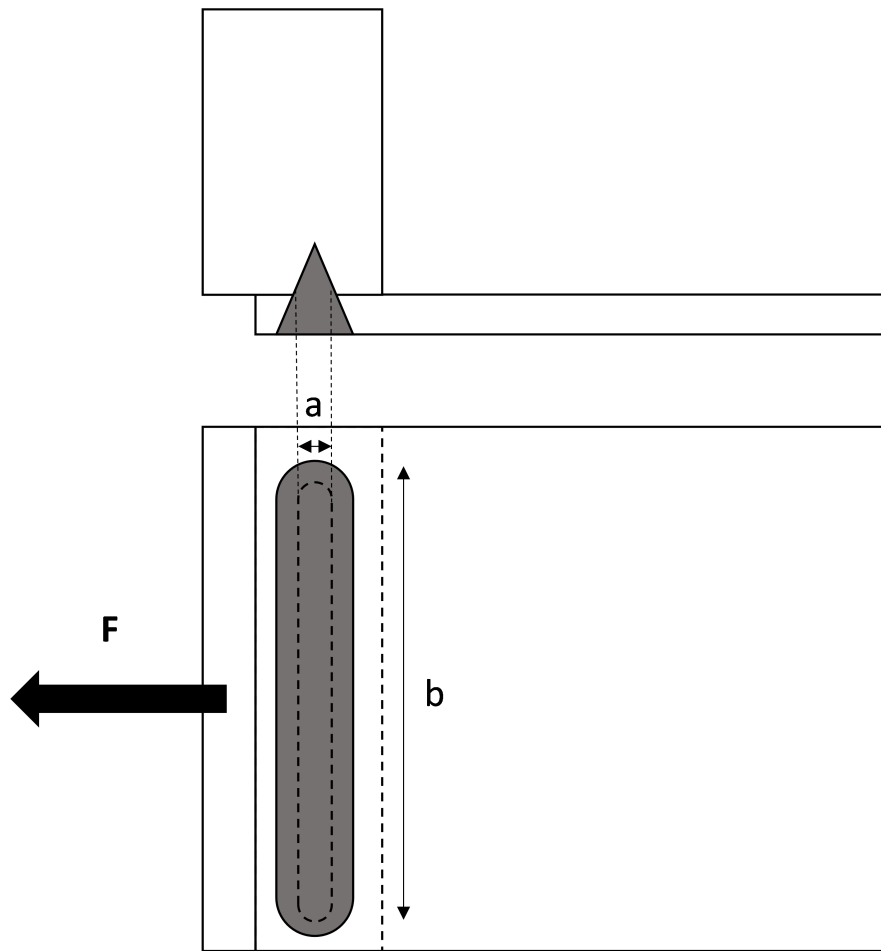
Geometry of the initially calculated Laser weld
